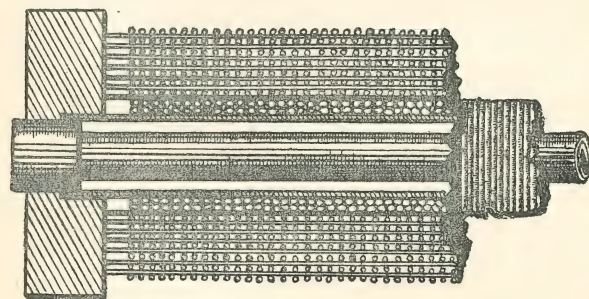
CONTINENTAL METHOD OF WINDING COILS.
